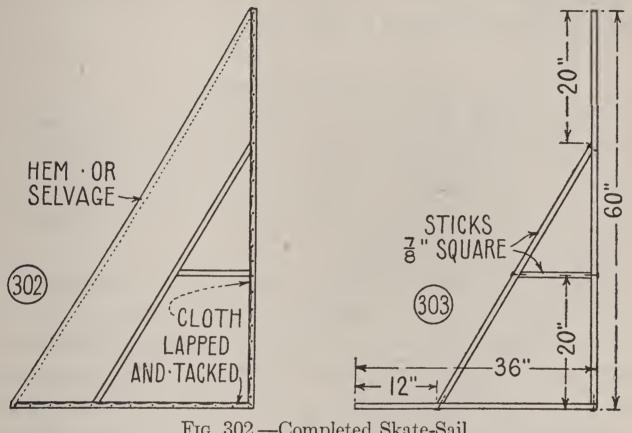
Completed Skate-Sail. Fig. 303.—Frame Detail.
